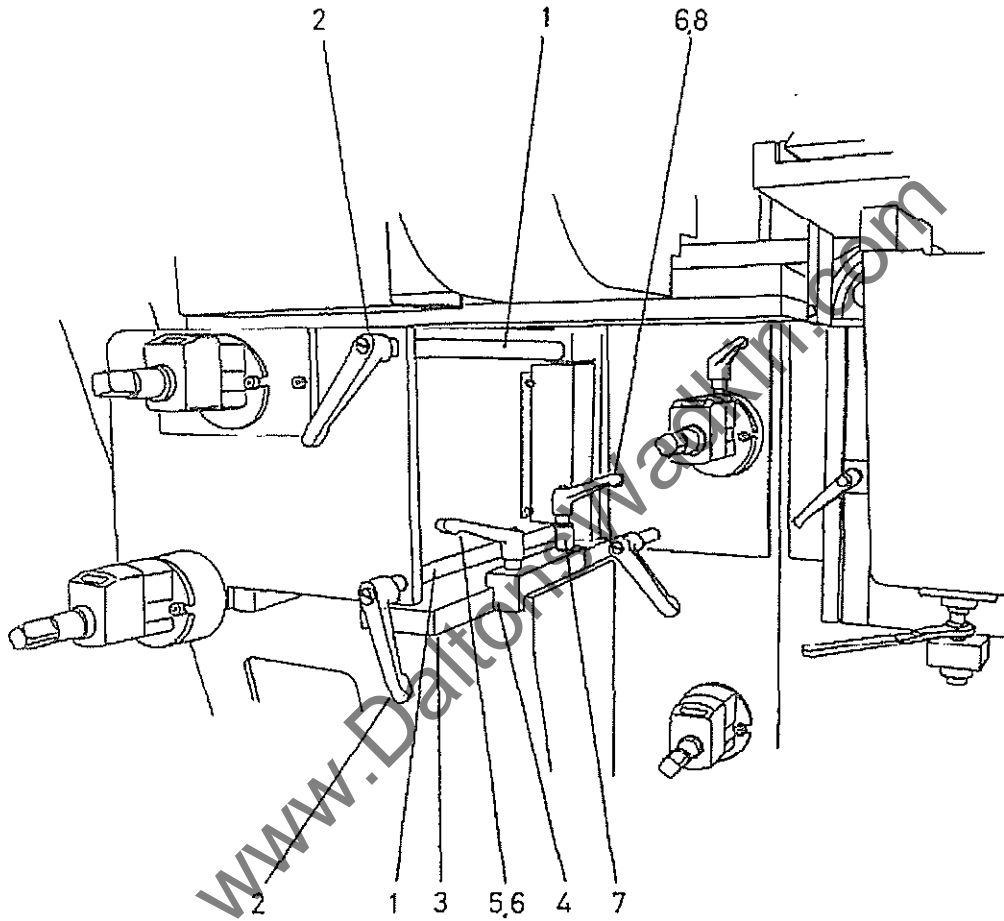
NEAR SIDE HEAD SPINDLE AND CARRIAGE LOCKS
